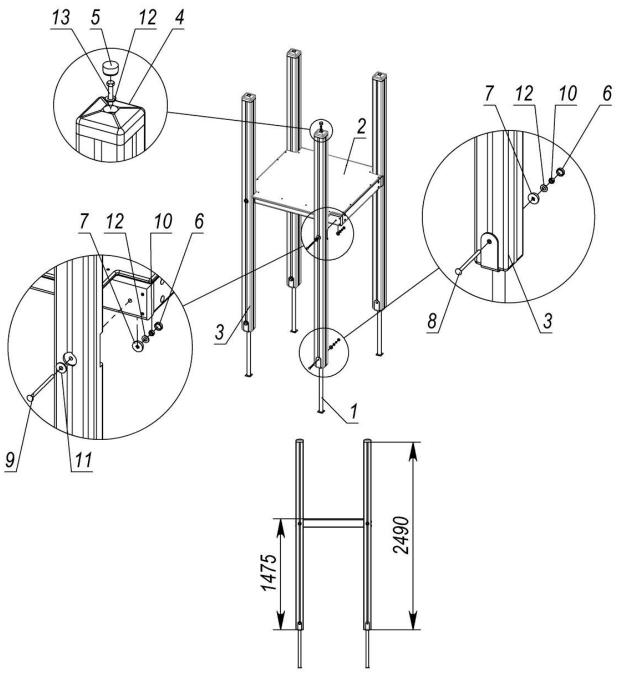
Complete set and assembly scheme of the tower 1,5m (beam 2,5-2,95). Marked under №5 on picture 2
